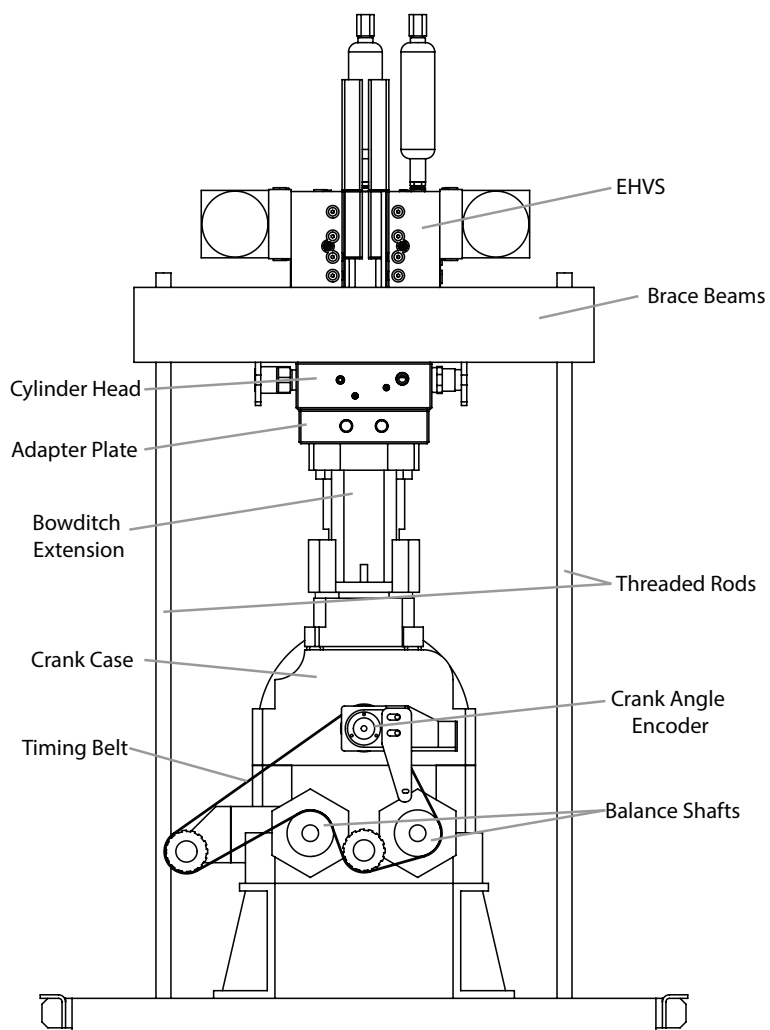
Front view drawing of final high-pressure optical engine assembly
